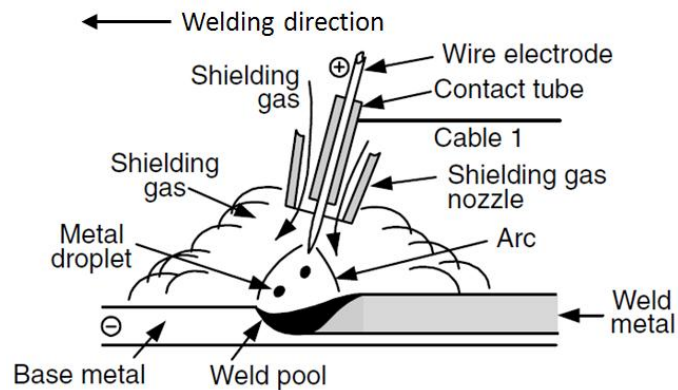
Schematic illustration of welding area in Gas Metal Arc Welding [Kou02]
